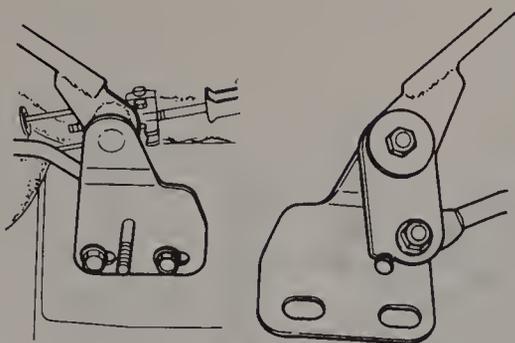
Use an 8 mm bolt or drill bit to align the notch in the selector lever with the hole in the mounting plate (Sec 4)
